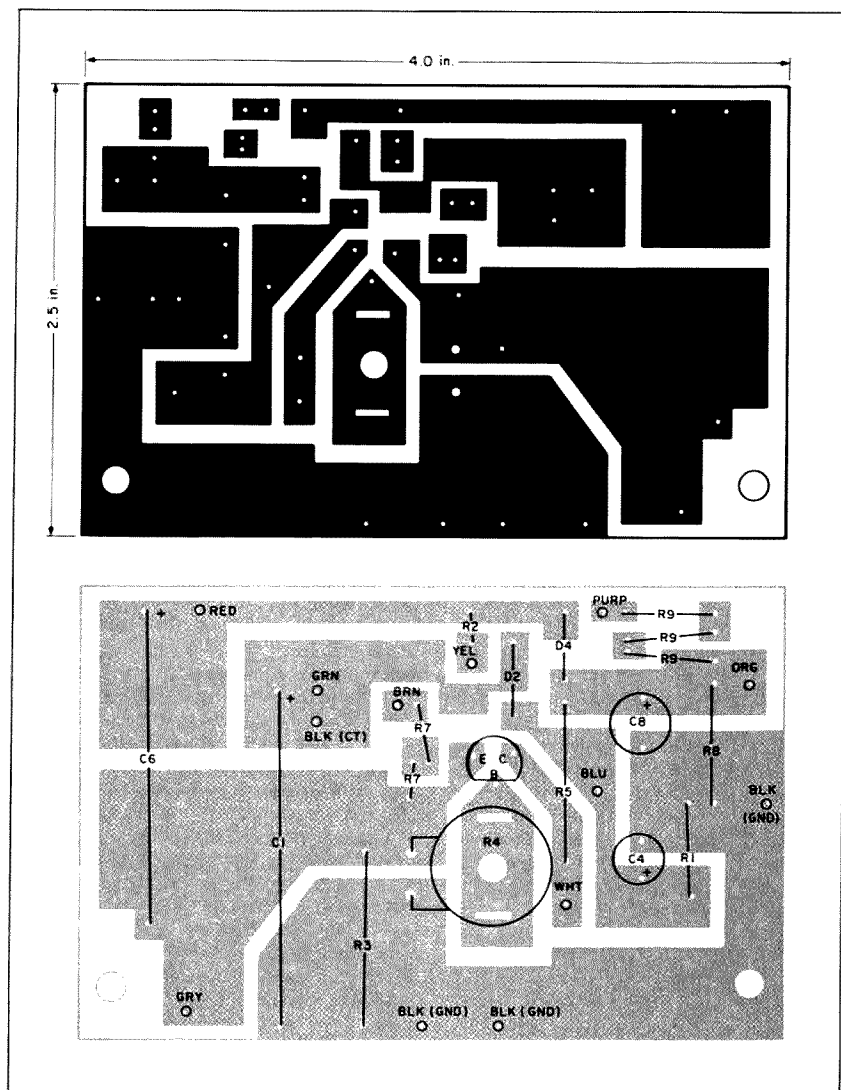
(a) Printed circuit board foil pattern; (b) Top side of board, showing component placement.
